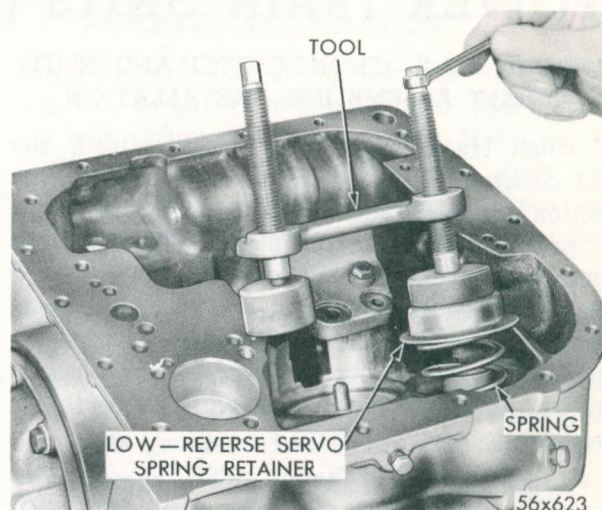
Compressing Low and Reverse Servo Spring and Retainer
